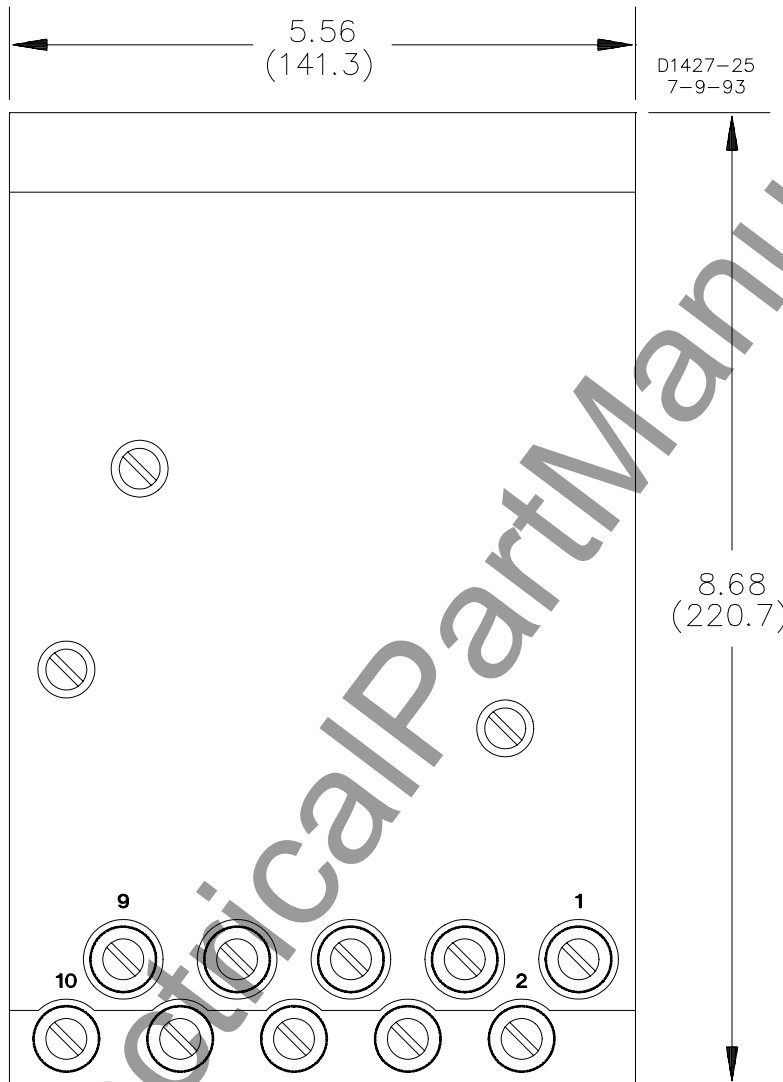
S1 Case, Single-Ended, Projection Mount, Outline Dimensions, Rear View
